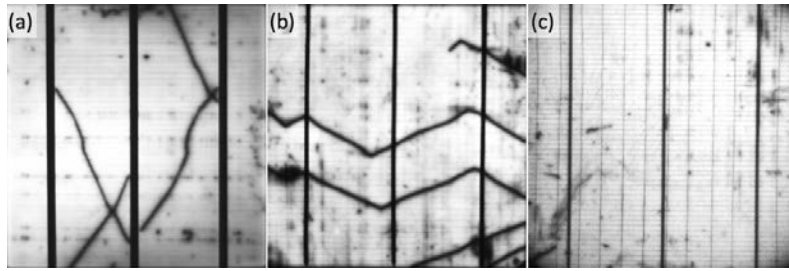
EL images of one-cell modules: (a) Ribbon 4 mm-wide, the module cracked after flexed to 6 cm bend radius. (b) Ribbon 2 mm-wide, the module cracked after flexed to 4 cm bend radius. (c) Indium coated wires, the module didn't crack after flexed to 4 cm bending radius. The tested cells were 100 cm^2 and 153 cm^2 .
